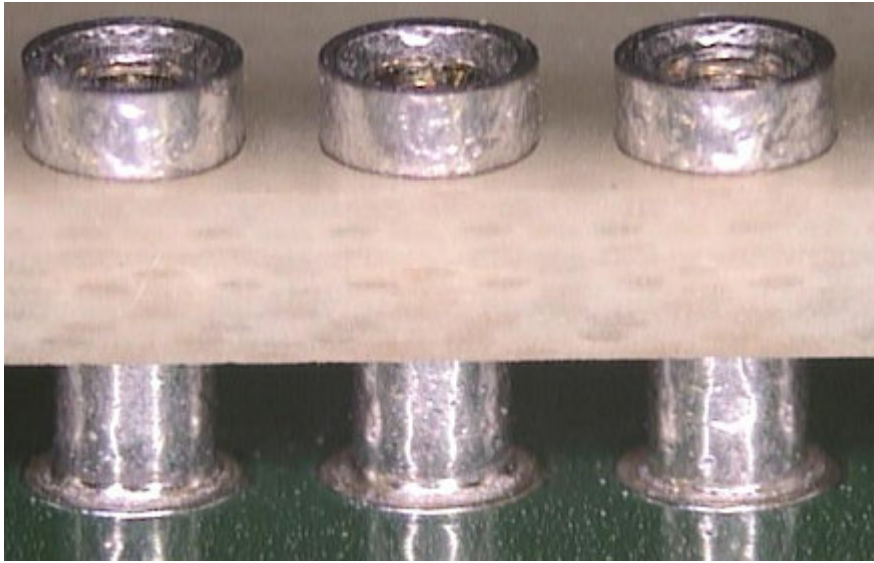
Picture of board assembly (Matte Tin terminal – Tin/Lead PCB)
